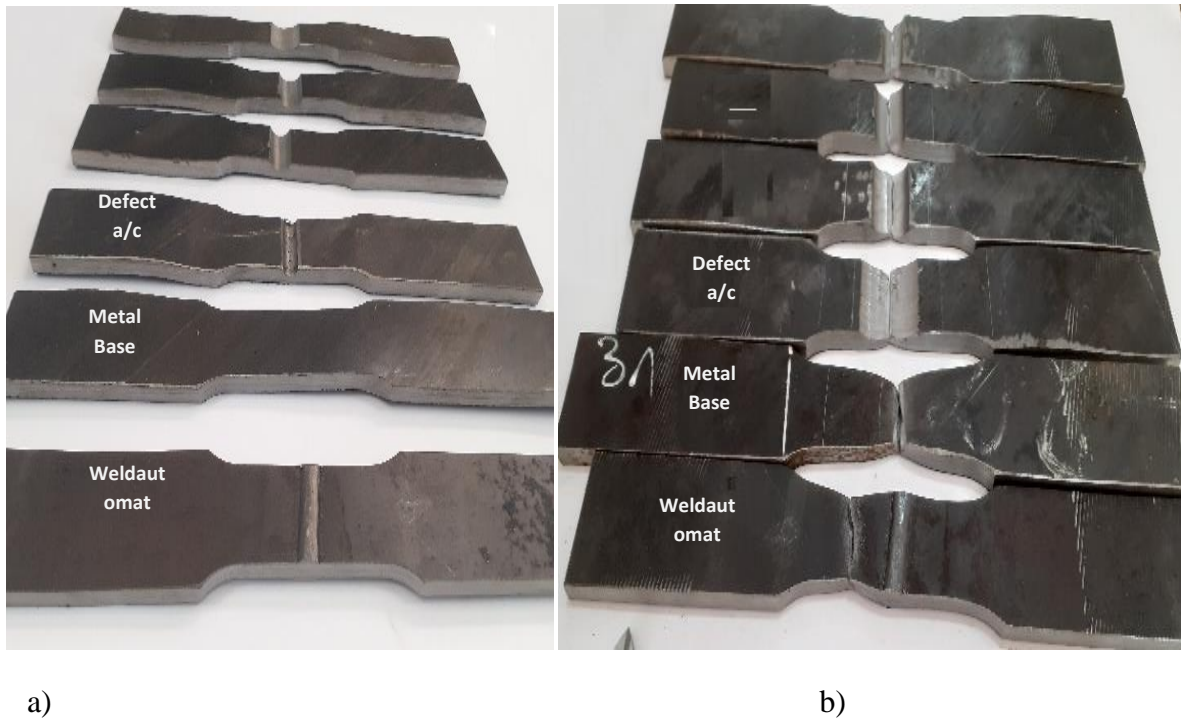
Experimental set up (a) Before Failure, (b) After Failure.
